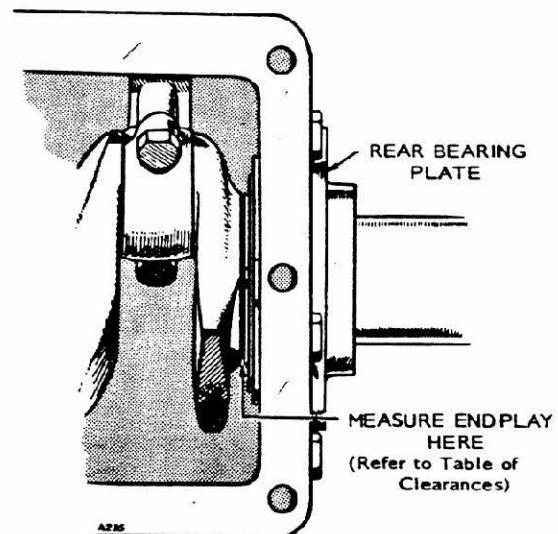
MEASURING CRANKSHAFT ENDPLAY
